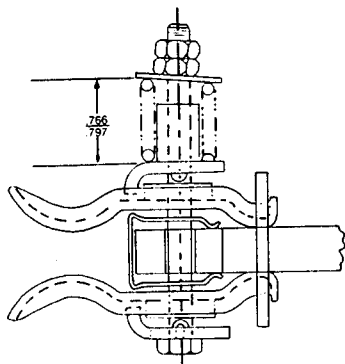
PRIMARY FINGER ADJUSTMENT
